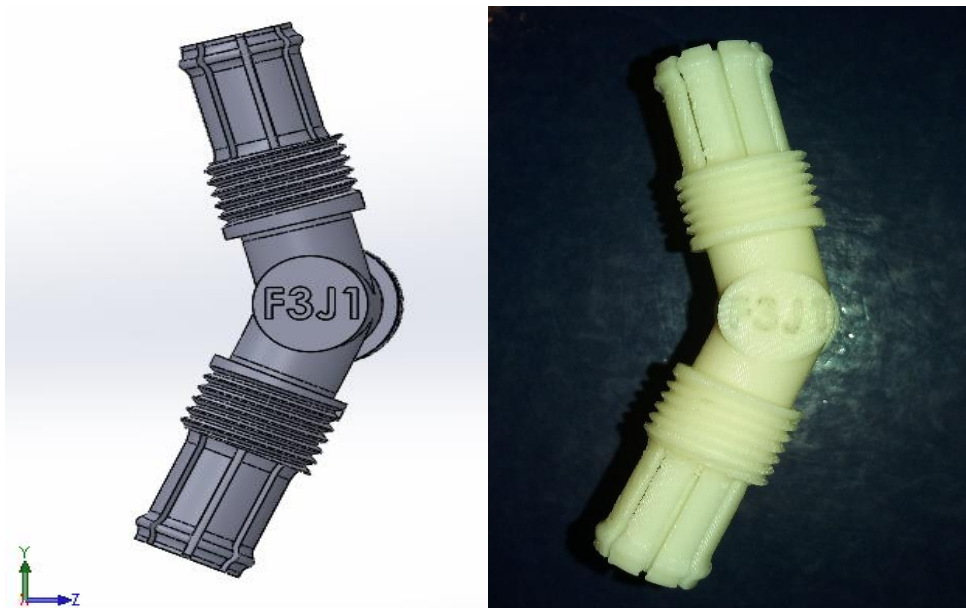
Assembly test - F3J1 joint CAD Model and 3D printing result.
